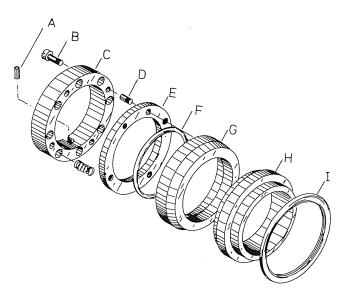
Mechanical Shaft Seal Assembly, Exploded View
